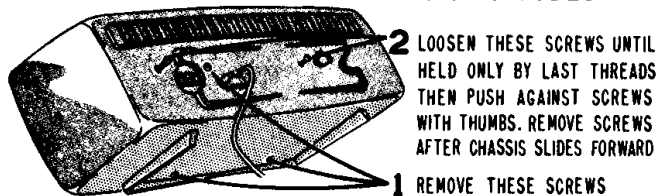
Rear View of Cabinet Showing Chassis Mounting Screws.
